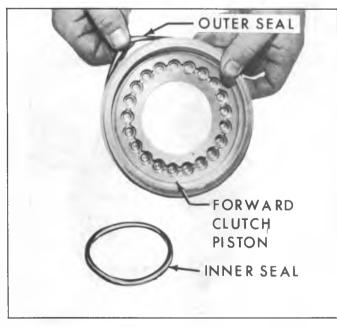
M--Removing Forward Clutch Piston Inner and Outer Seals
